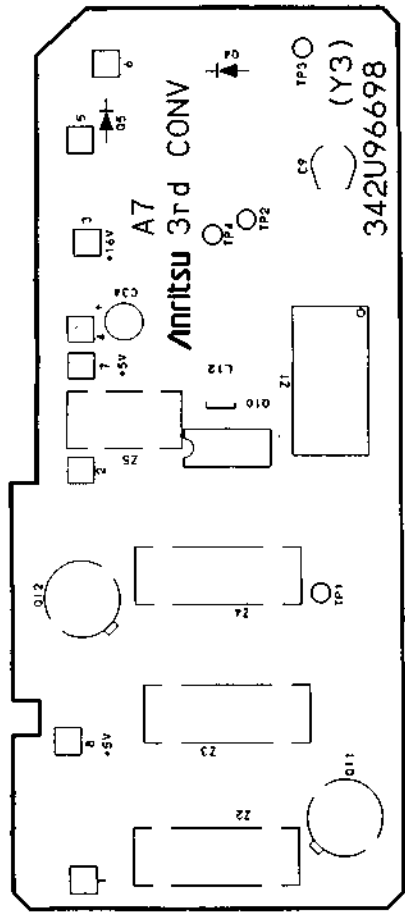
(1/2) A2-A7 3rd CONVERTER PC-Board Parts Layout (Component Side) 15
